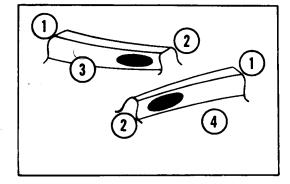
RING GEAR TOOTH PATTERN, UNLOADED
